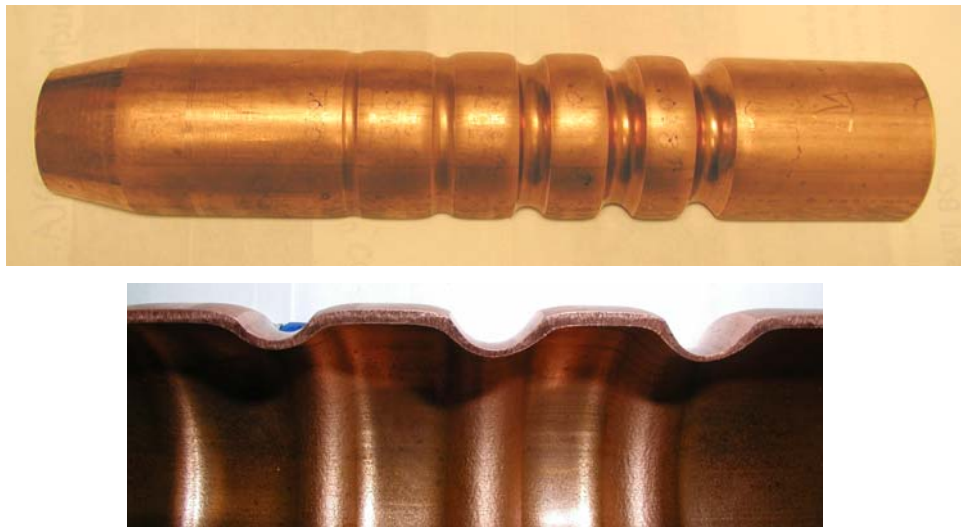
Upper: Copper tube with swaged radial grooves and necked diameter. Lower: Cross section of the swaged tube.
